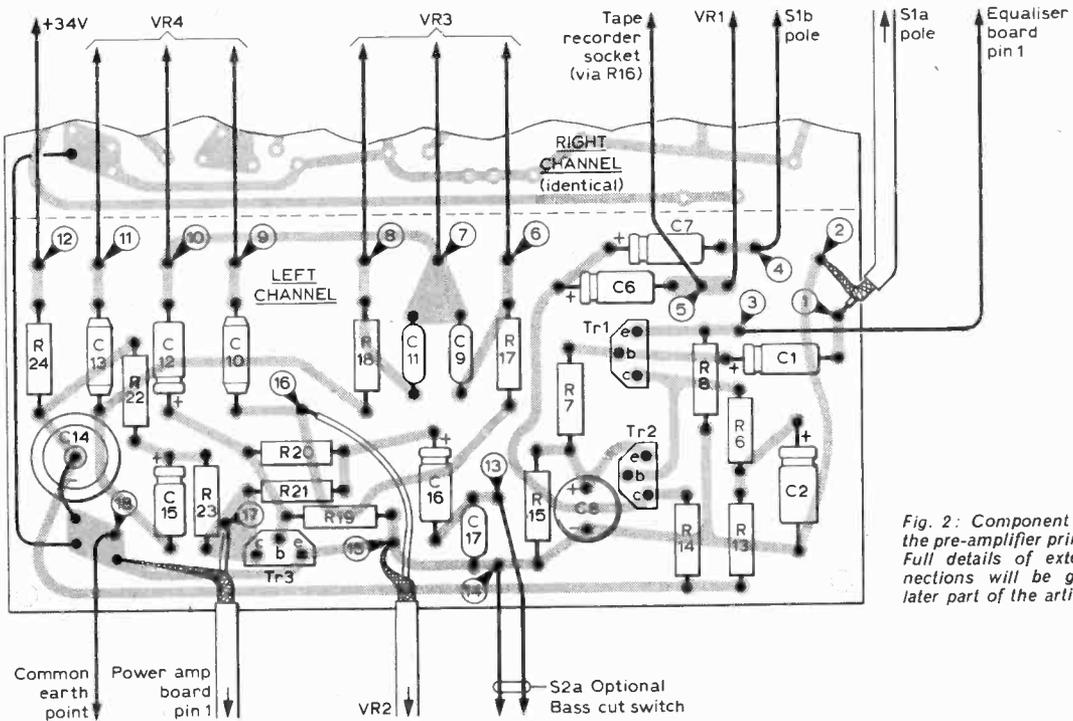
Component layout for the pre-amplifier printed board. Full details of external connections will be given in a later part of the article
